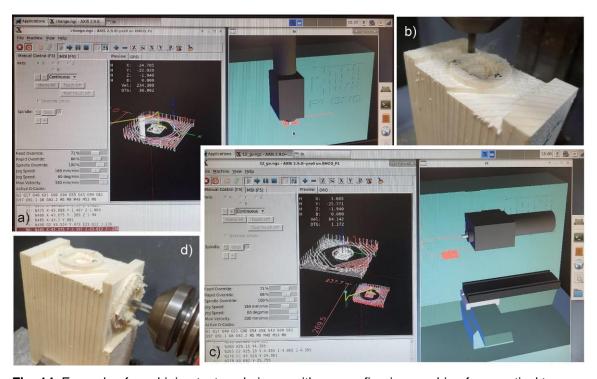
Example of machining test workpieces with a reconfiguring machine from vertical to horizontal
